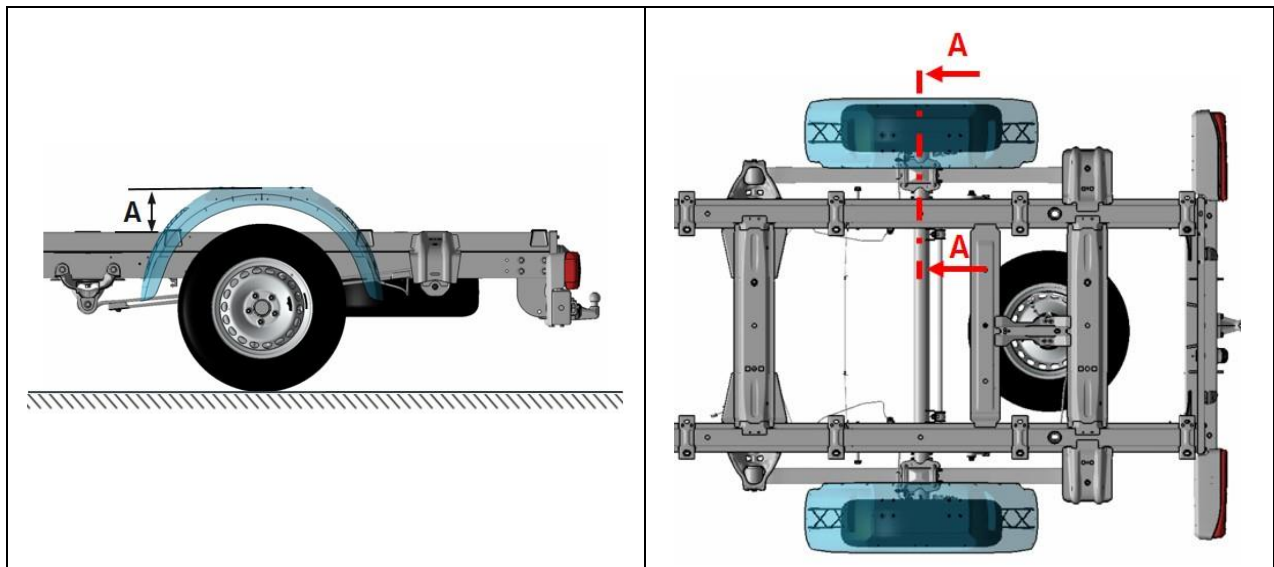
Dimensions for wheel housing/partial cover (example: side platform wheel housing)
